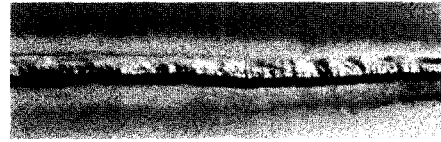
Bead shape AC pulse MIG welding(EN ratio 20%)
